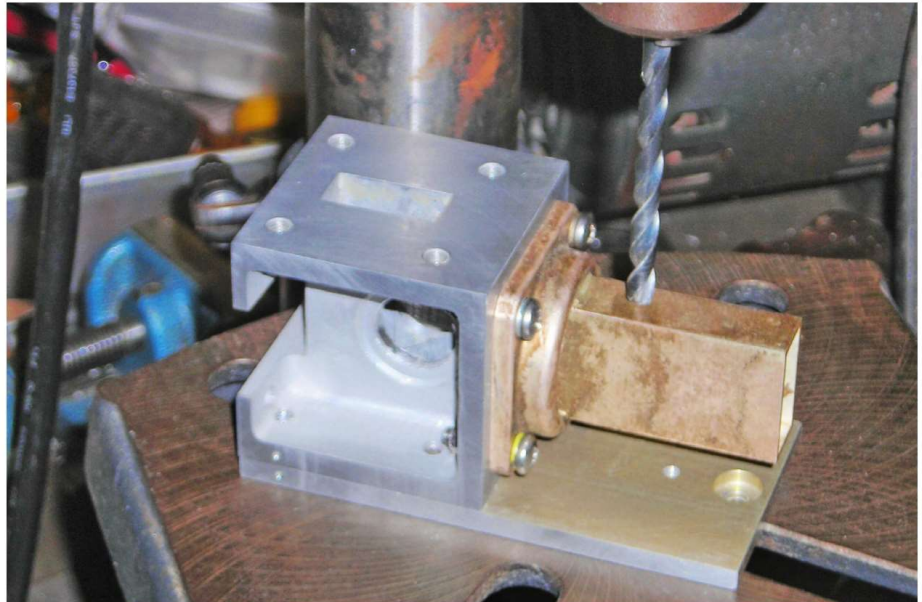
A section of WR90 waveguide attached to a circulator having a flat stabilizer plate facilitates bolting to a drill press stage or sliding about on a work table. The multiple, mutually perpendicular faces, makes it easy to position a block to present the most desired orientation for drilling, marking or machining.
